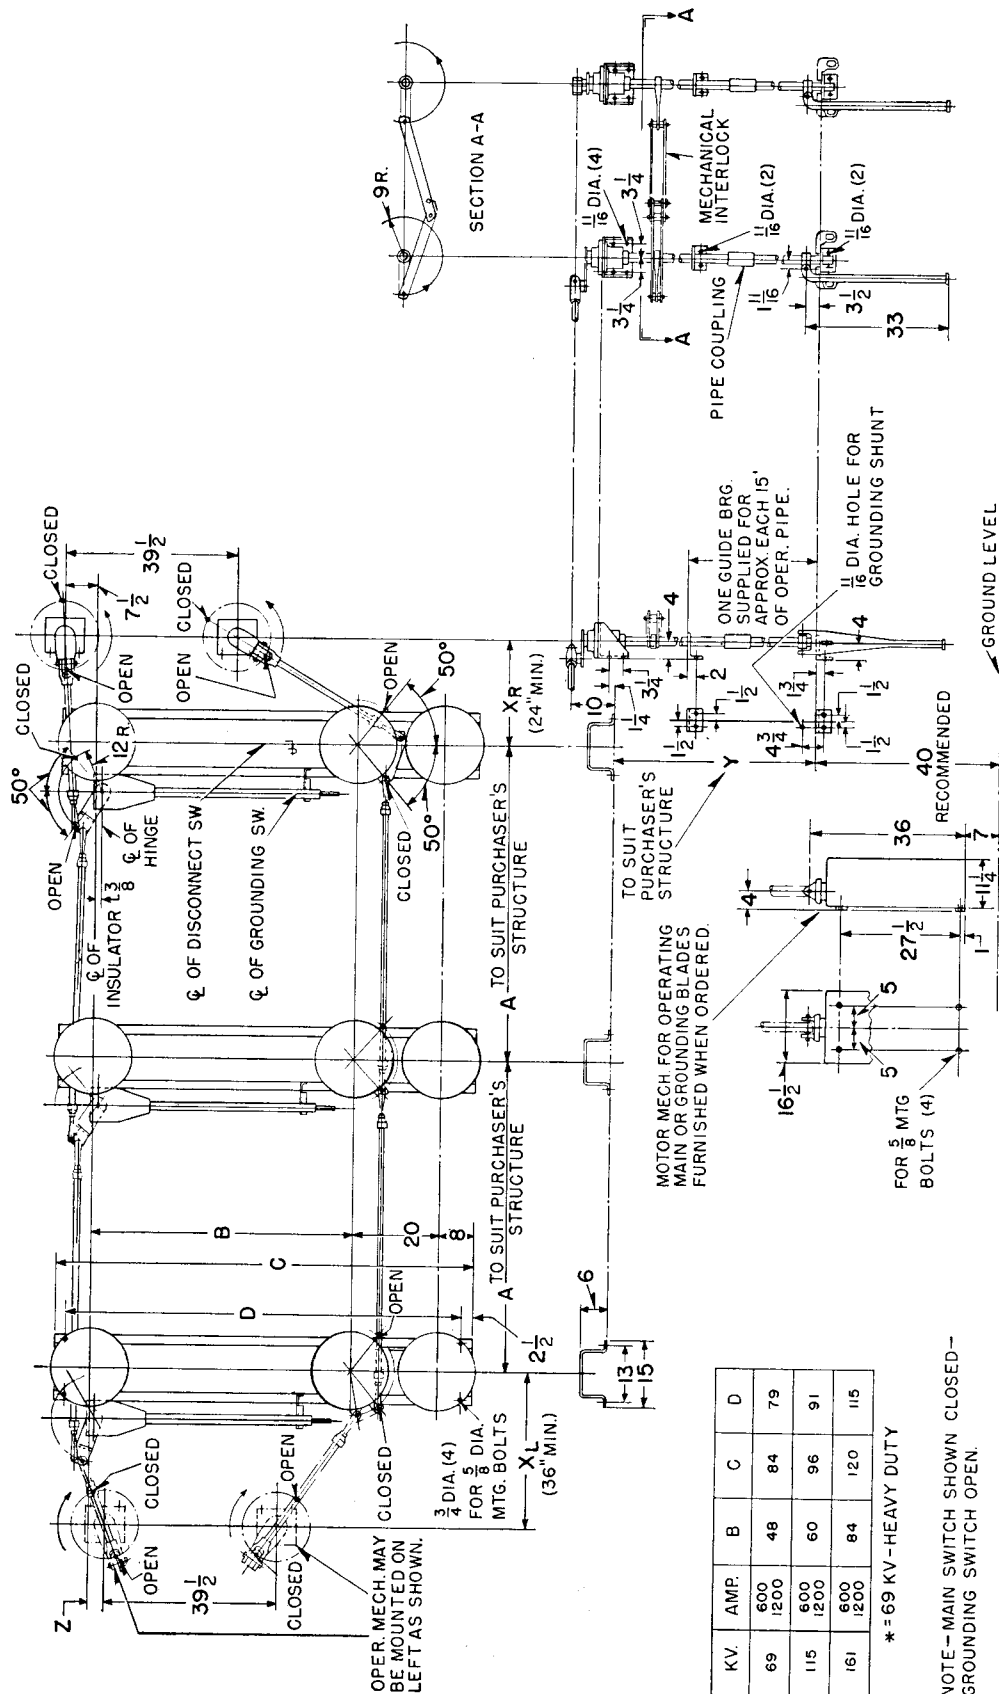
Horizontally Mounted, 69 kv H.D. to 161 kv, 600-1200A Type V Switch with Grounding Blades
